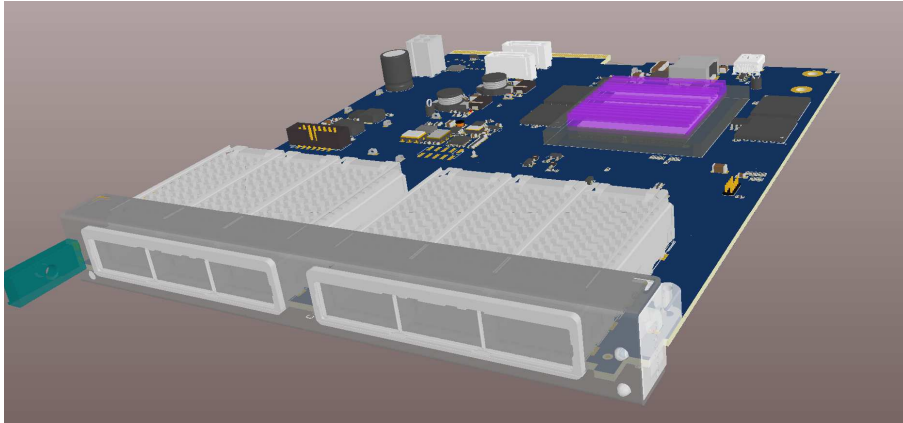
Drawing of AMC board with 24 optical links using QSFP transceivers
